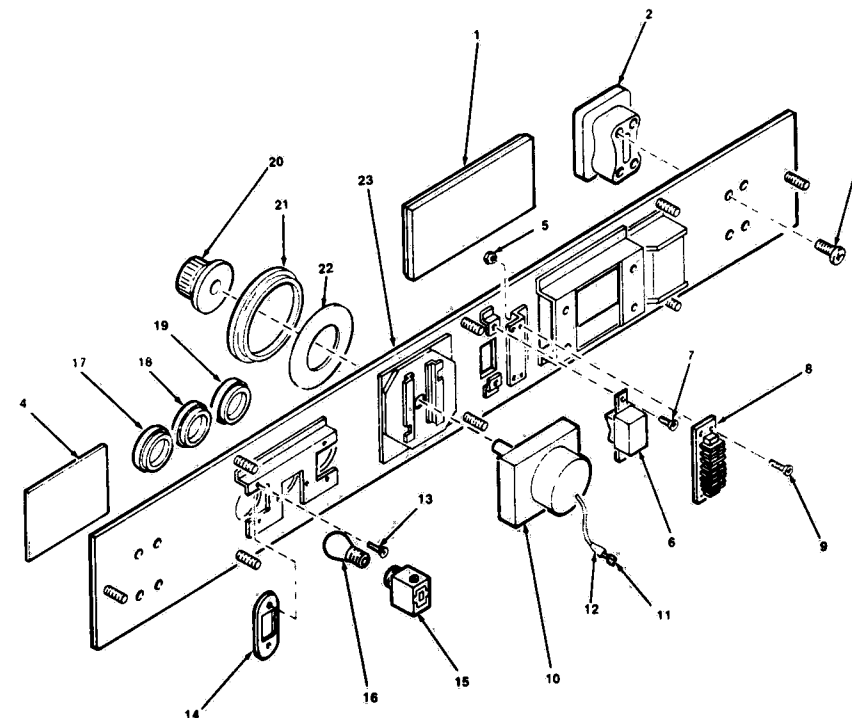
DOOR CONTROL PANEL ASSEMBLY.
